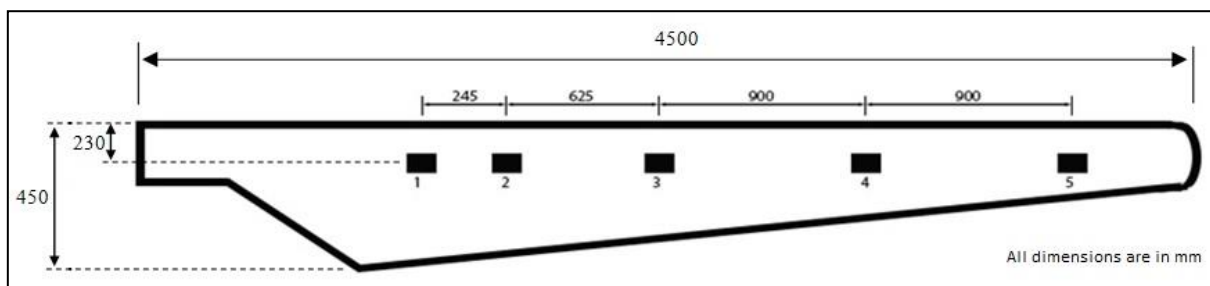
Dimensions of the blade and positions of the five installed strain gauges
